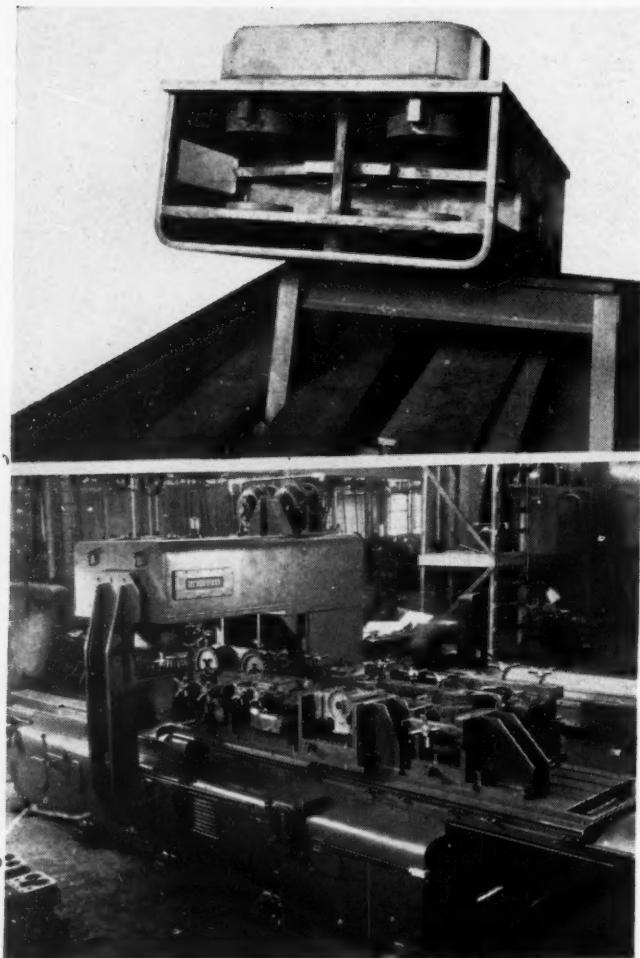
Top—Looking into the end of a fixed height rail having built-in spindle carrier. This section is used in the machine in Fig. 5. Fig. 5—Above—Front view of special steel milling machine with four spindles for milling seven surfaces of two-cylinder engine block
